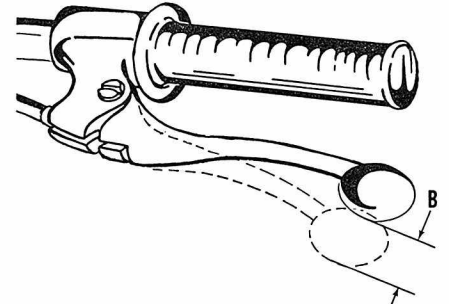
Clutch hand lever should have  $\frac{3}{8}$ – $\frac{5}{8}$  in. free play at B.
